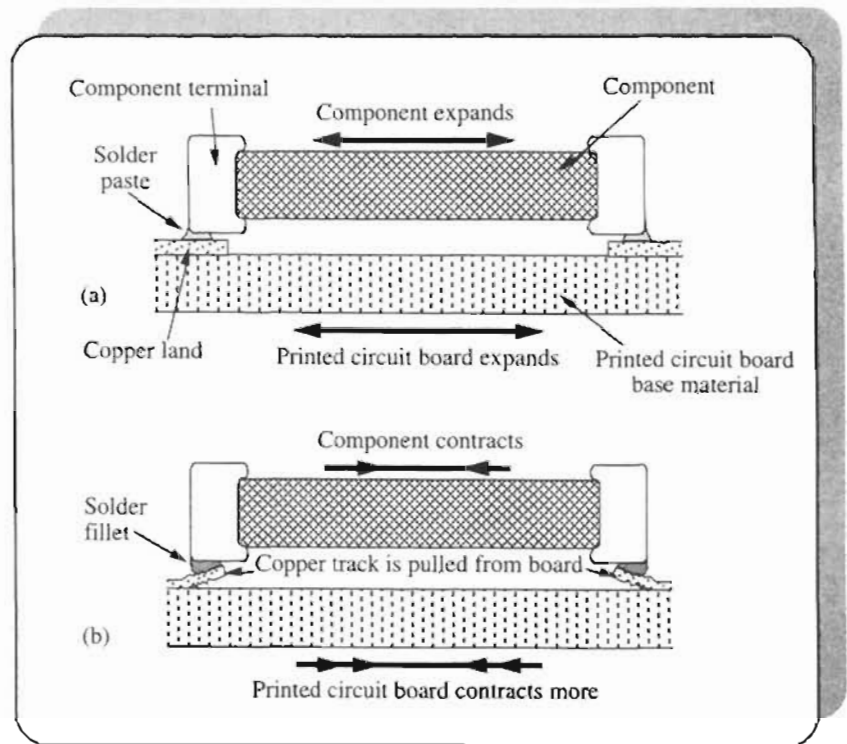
Showing how a mismatch of thermal coefficients between surface mounted components and printed circuit board base can cause damage on cooling after soldering
